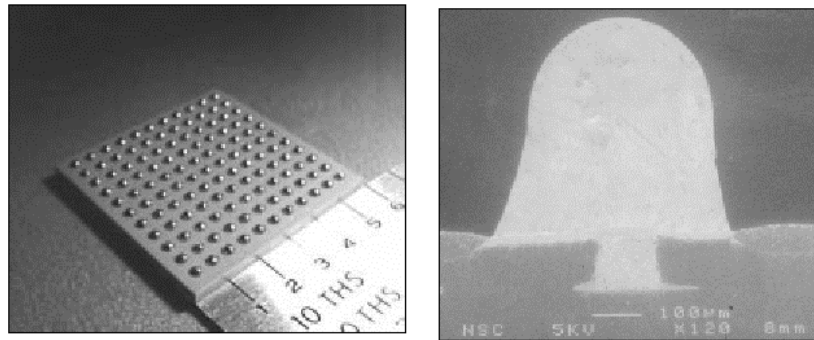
BGA package fabricated with LTCC technology and ball cross section.
